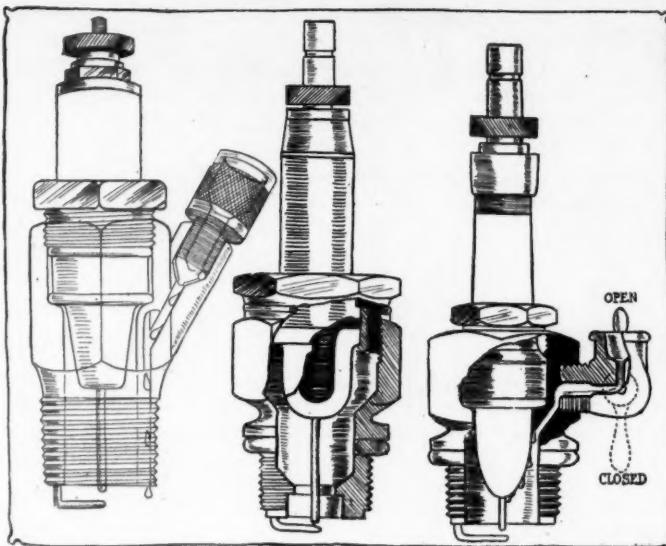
Champion priming. Fig. 11—Red Head combination. Fig. 12—Red Head priming
